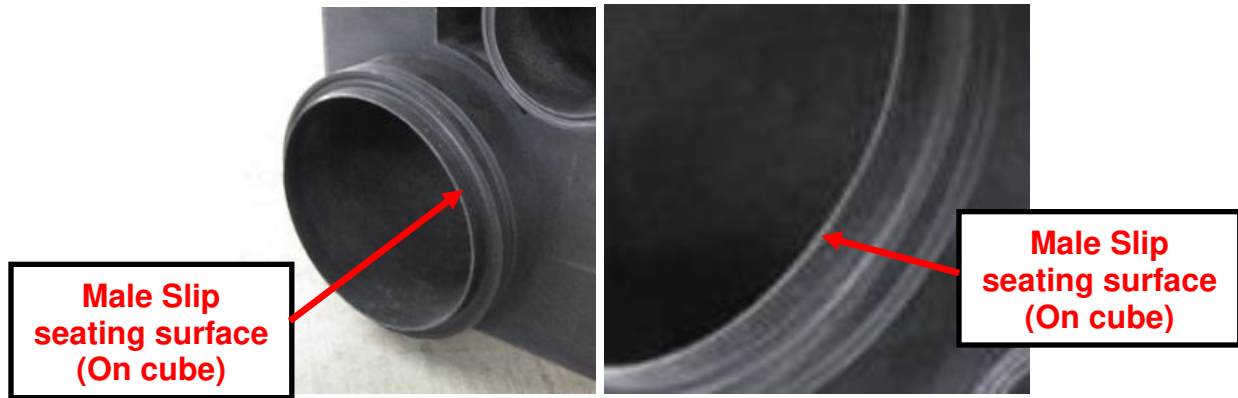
Gen2 male slip seating surface to help align O-Rings and adapters.
